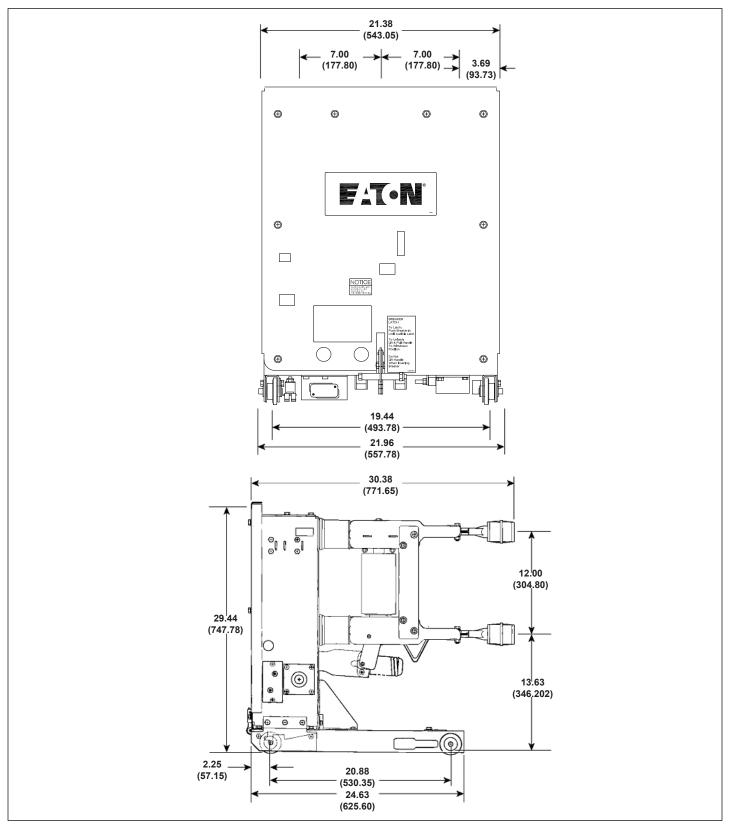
Type VCPW-ND circuit breaker outlines and dimensions in inches (mm).
